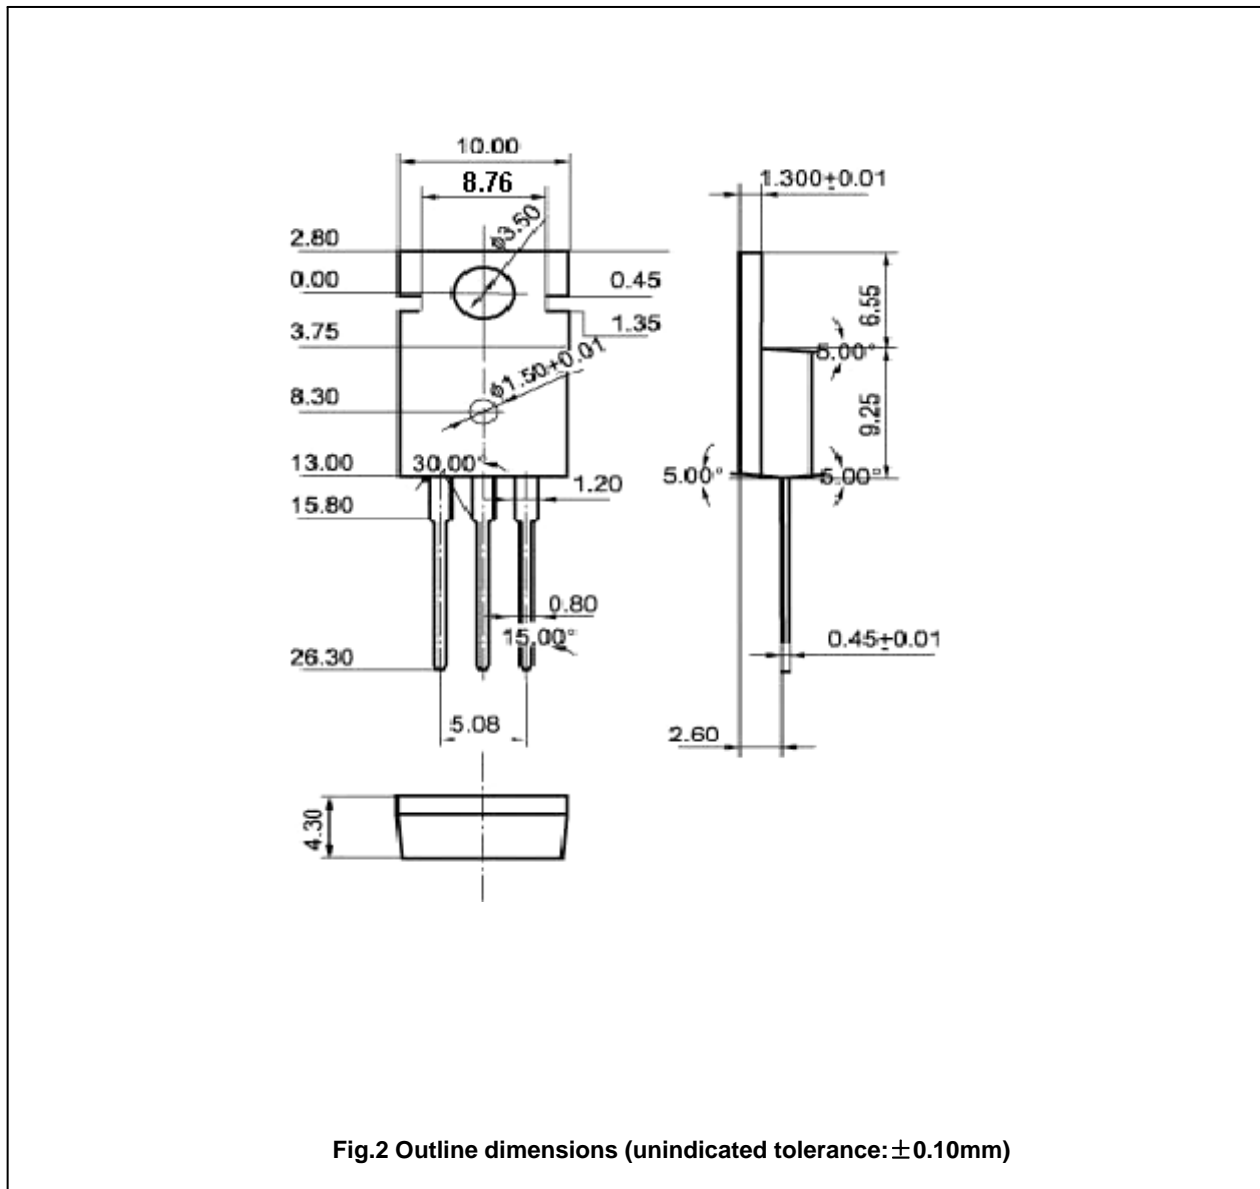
Outline dimensions (unindicated tolerance: $\pm 0.10\text{mm}$)
